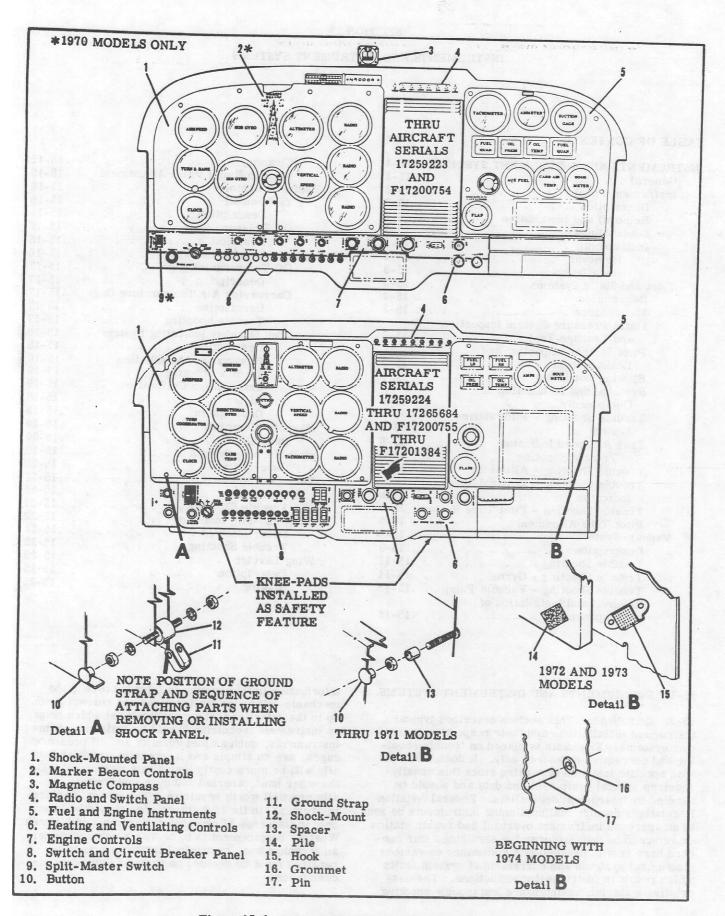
Typical Instrument Panel (Sheet 1 of 2)
